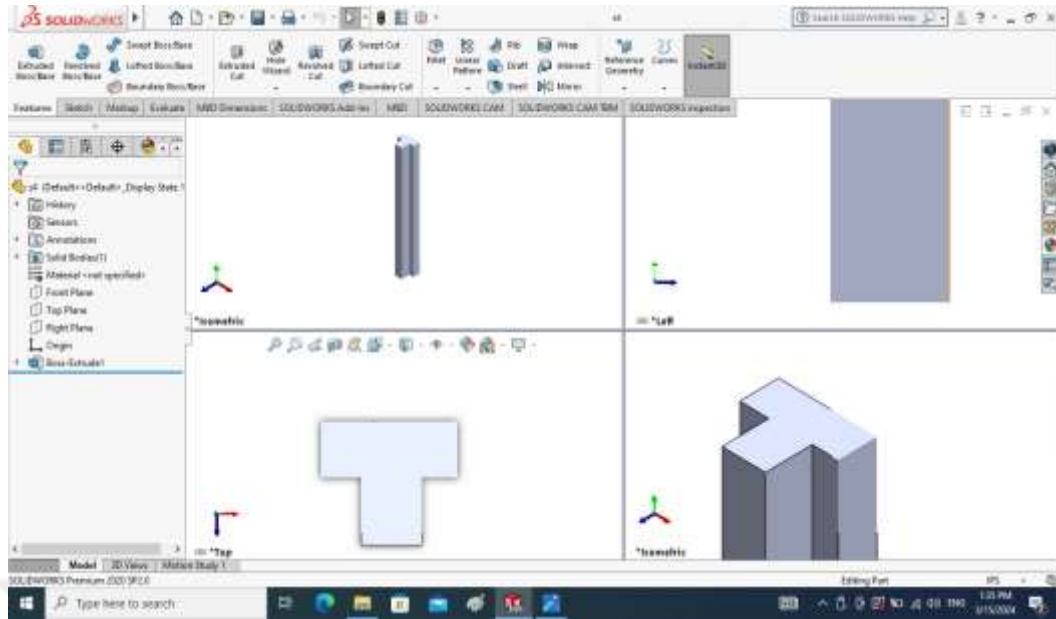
THE Dimensions of The Second Case Using SolidWork.
